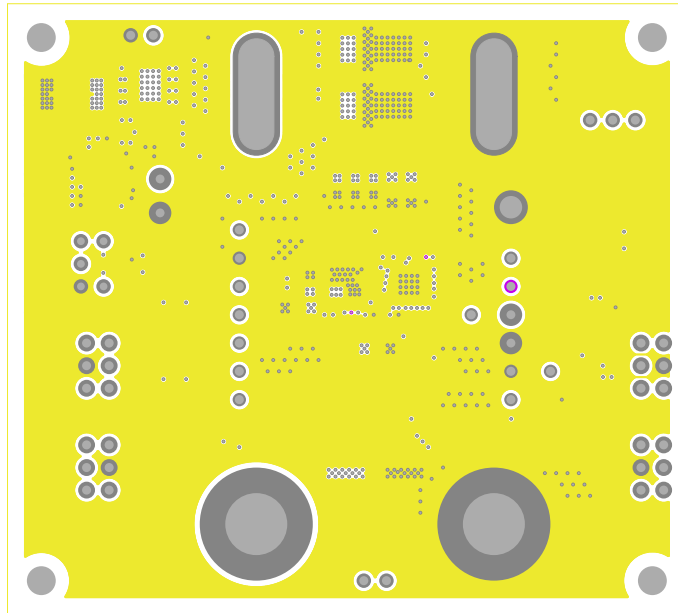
PCB - Inner Layer - Layer 2 (Top View)
